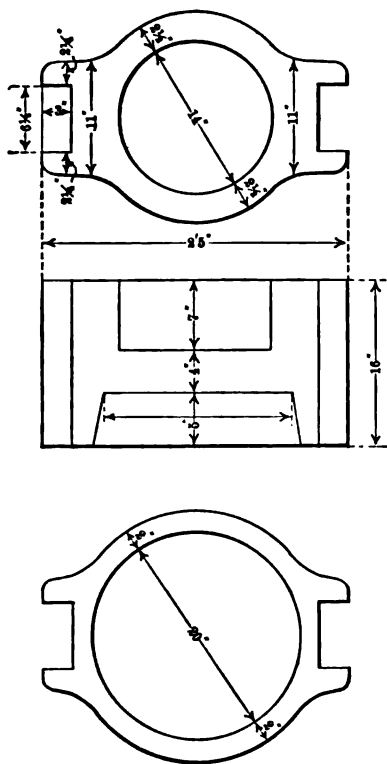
FOLLOWER CAP FOR WOOD PILES.
